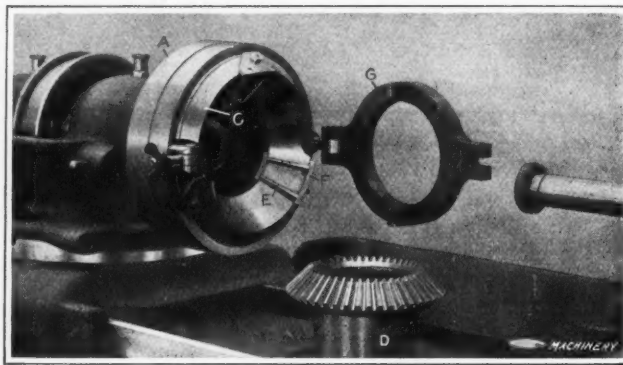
Satisfactory Type of Chuck for holding Bevel Gears when grinding Hole
